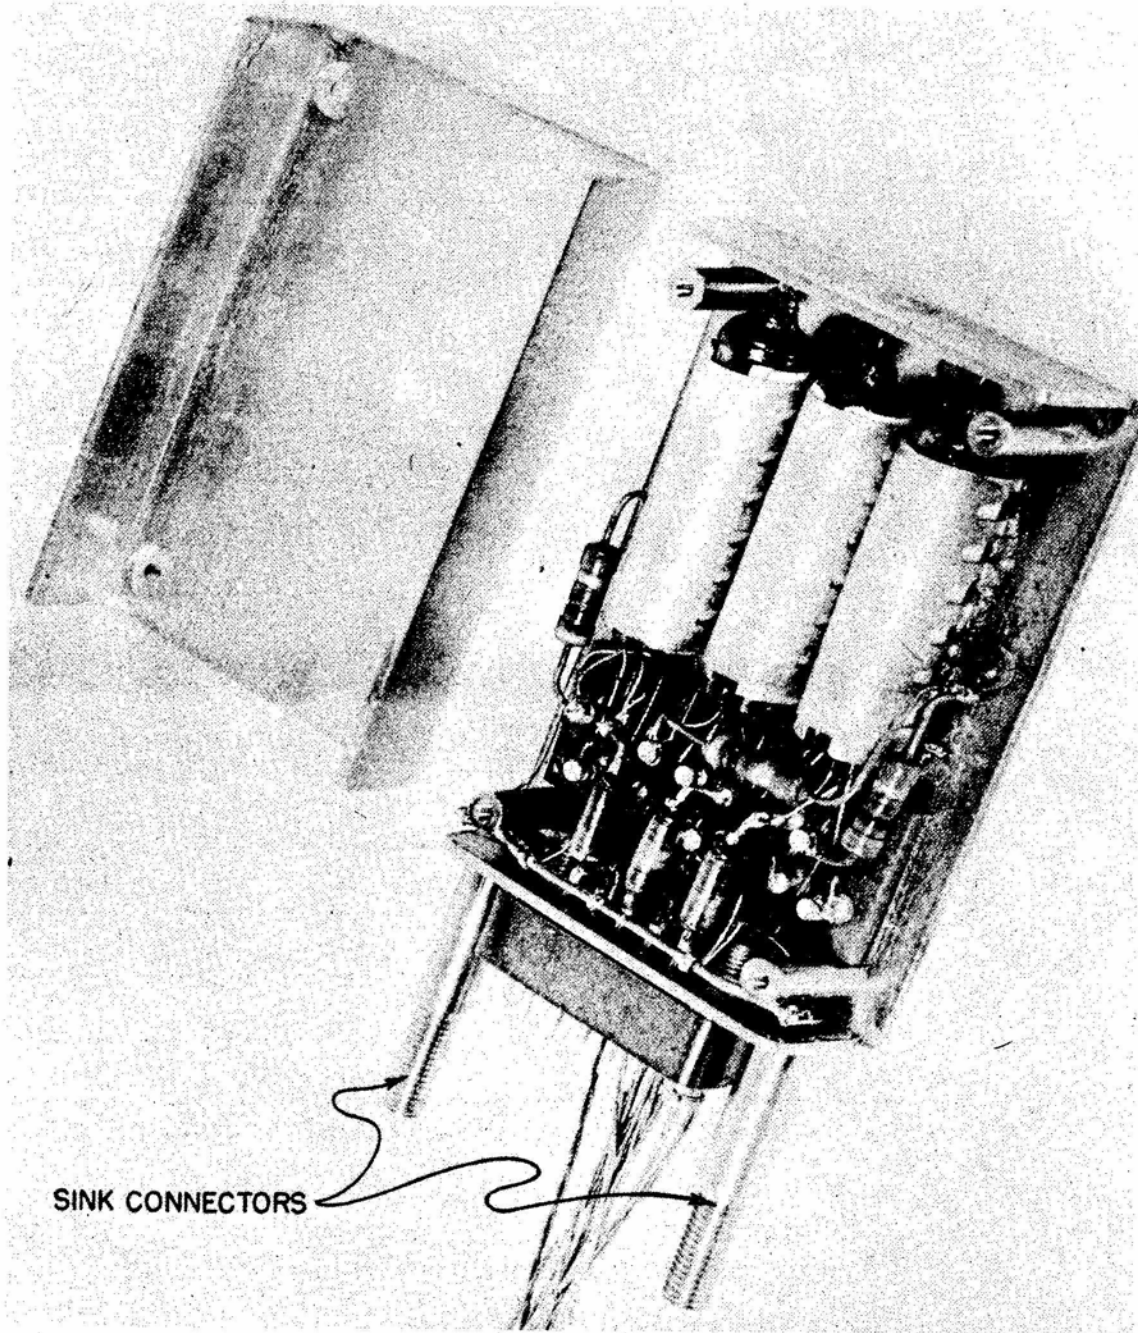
CONDUCTION COOLED ASSEMBLY
